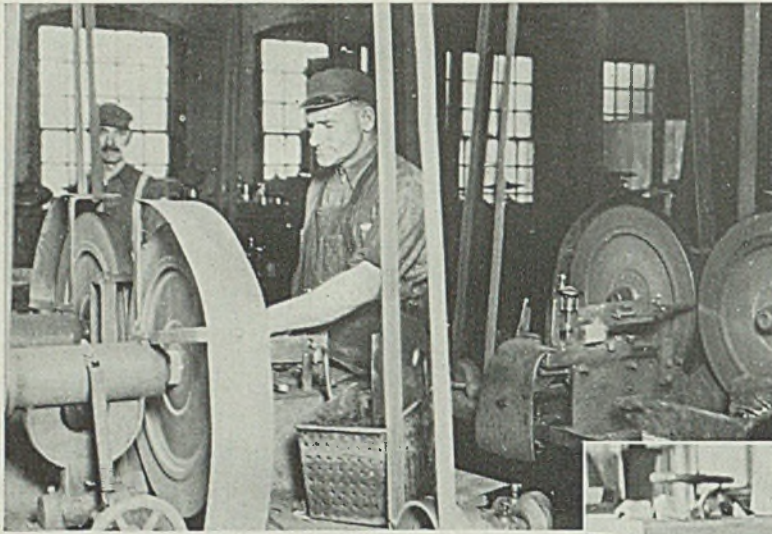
(left)—After glazing and washing, blades are finished further in this double-head polishing machine with medium texture canvas wheels headed up with alumina. Fig. 8 (below)—Mirror finish on blades is obtained in this specially-built machine with two polishing wheels of felt disks. Polished 24 at a time, the blades are arranged to float between the upper and lower wheels
